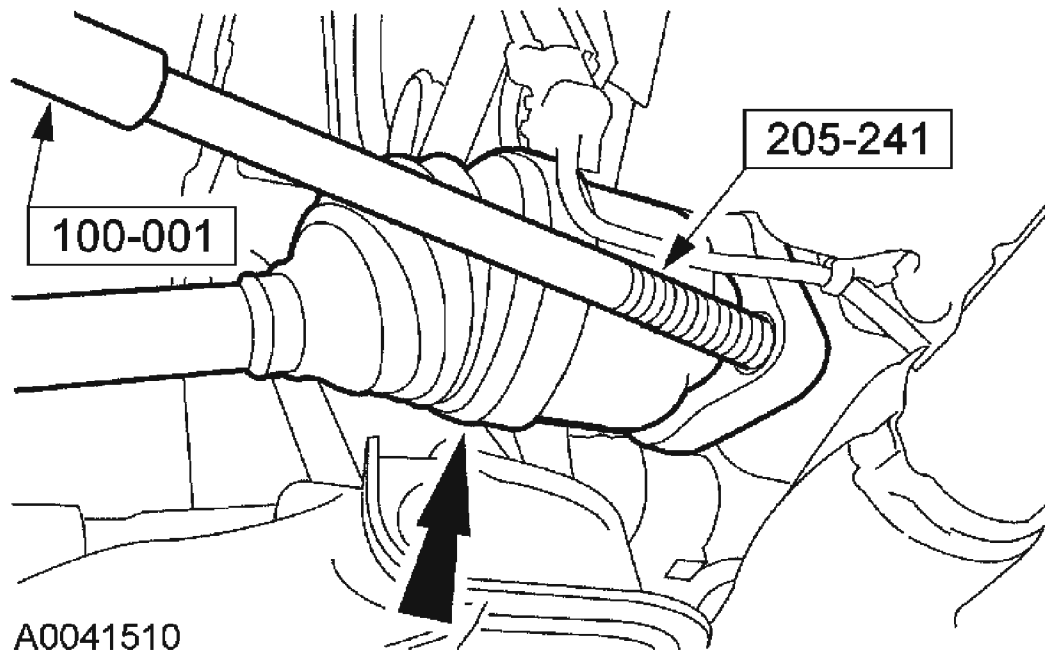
Removing LH Front Drive Halfshaft From Transaxle Using Special Tools
